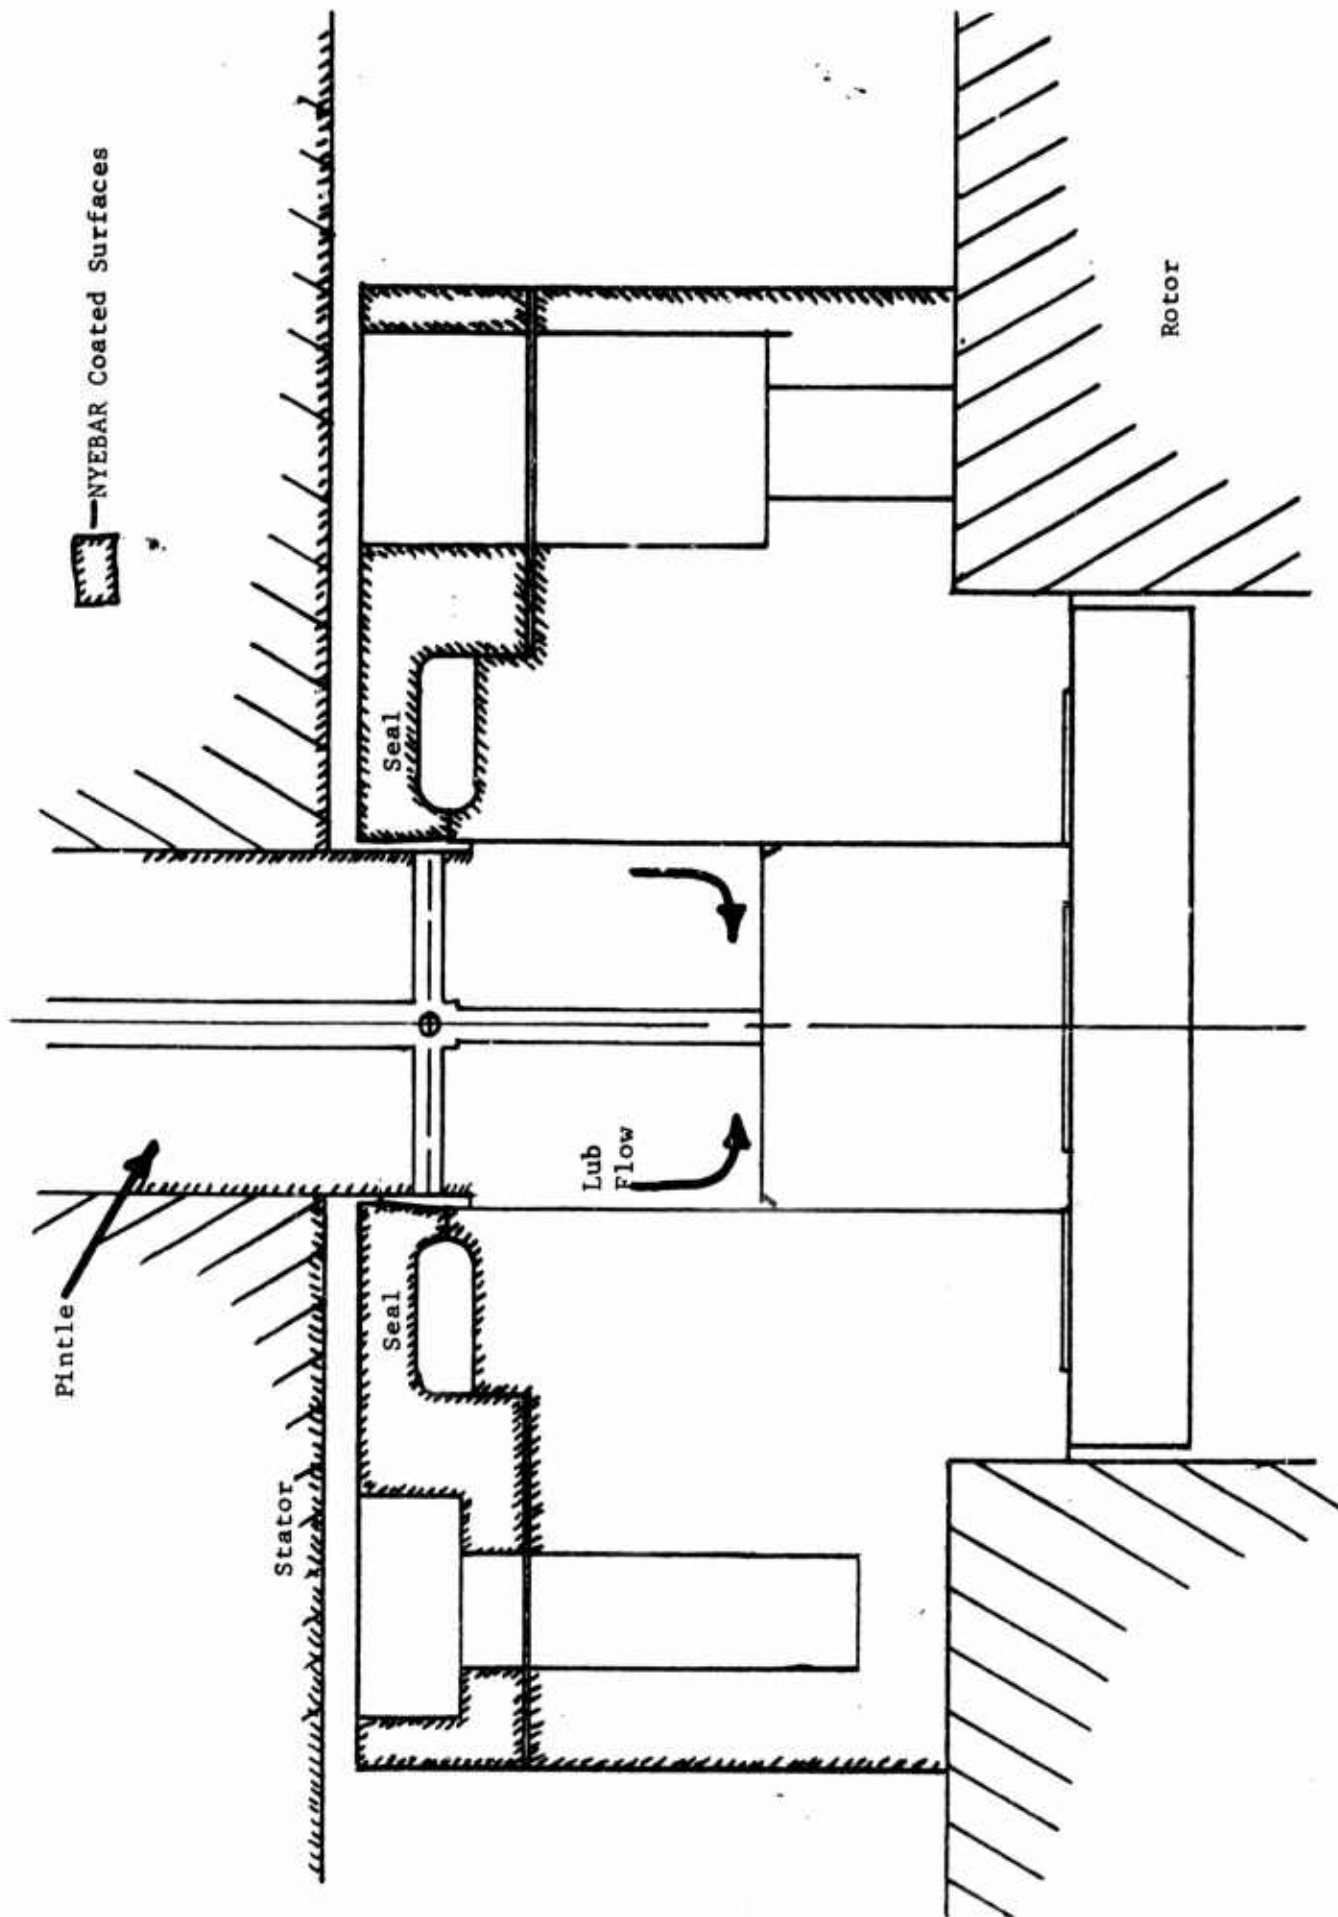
Bearing Surfaces to be Coated with NYEBAR
